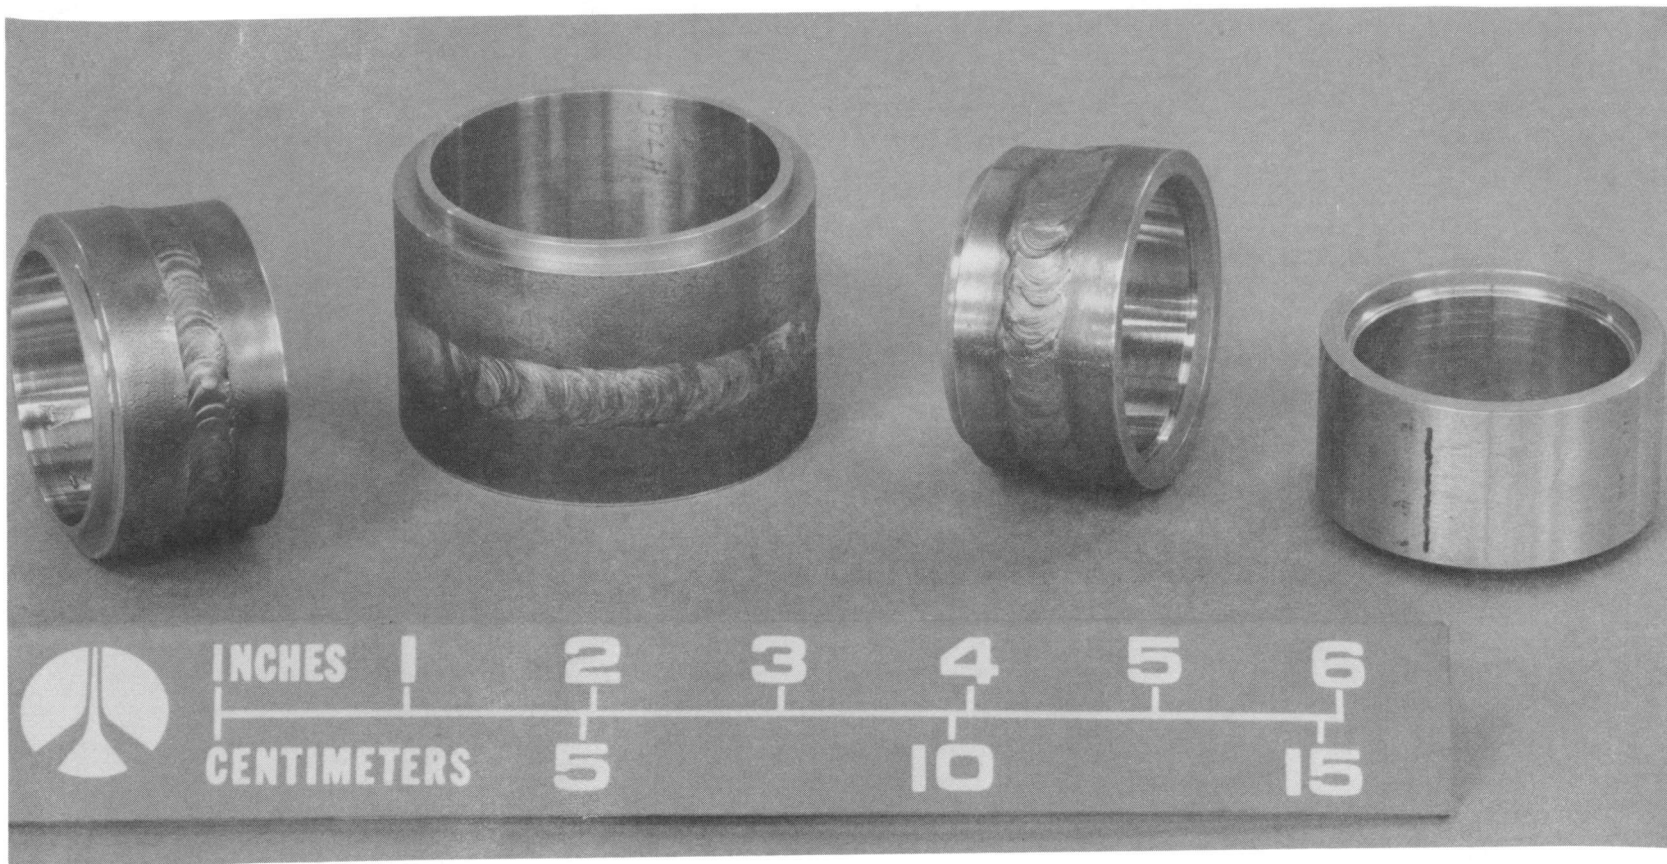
Close View of Typical Ring Specimens (weld joint specimens are toward the left)
